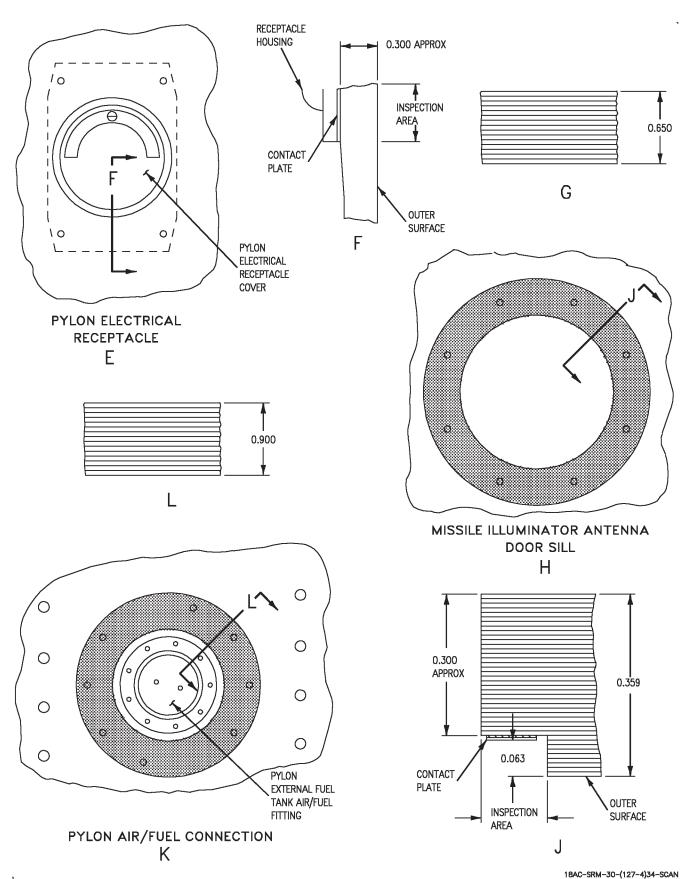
Inner Wing Lower Surface Solid Composite Laminate and Door Sill Inspection
